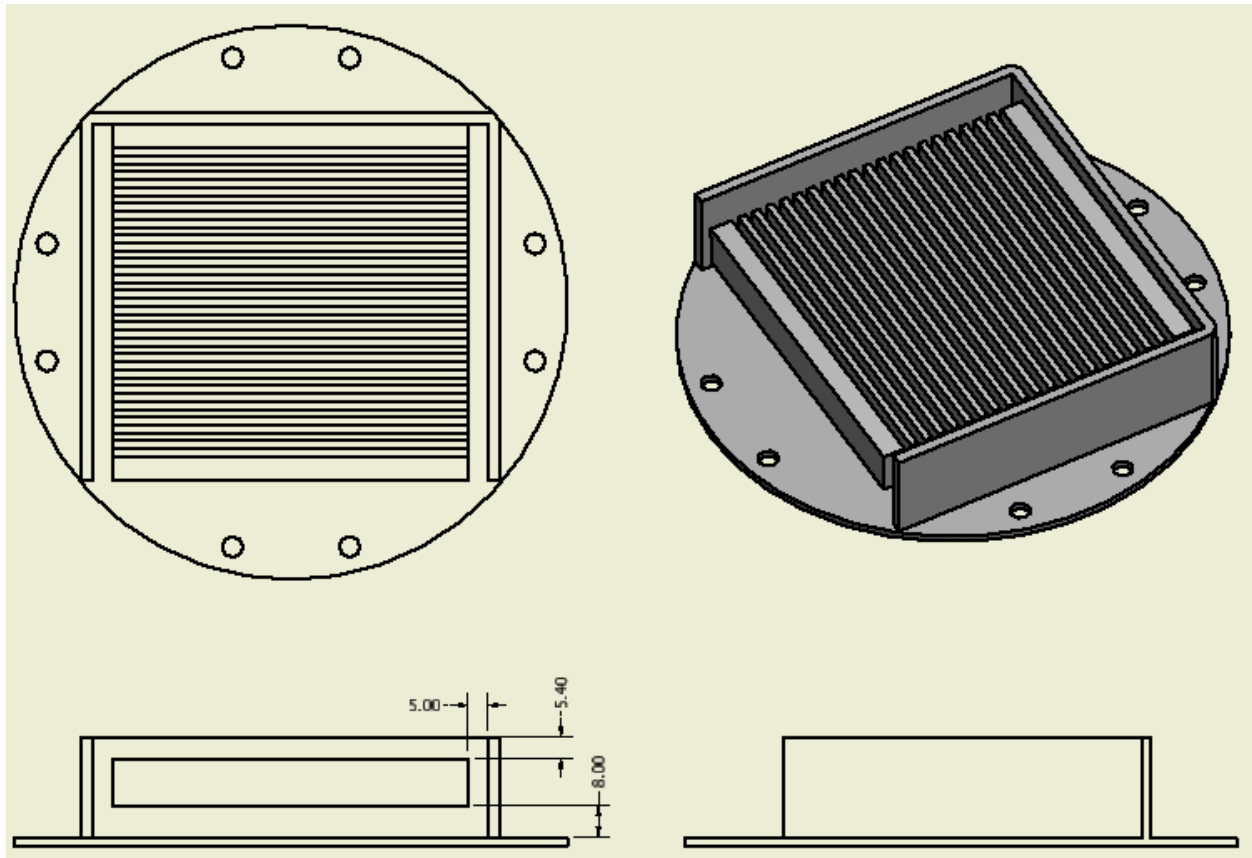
CAD drawing of the assembled first version LiMIT trenches
